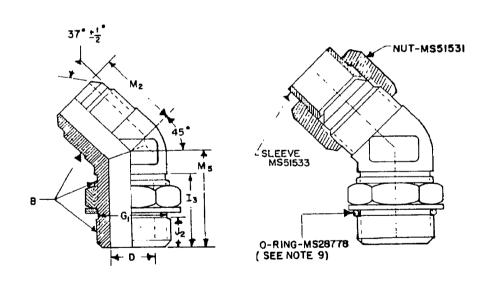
Elbow. Tube to Boss. 45 Degree. O-Ring. Flared.
